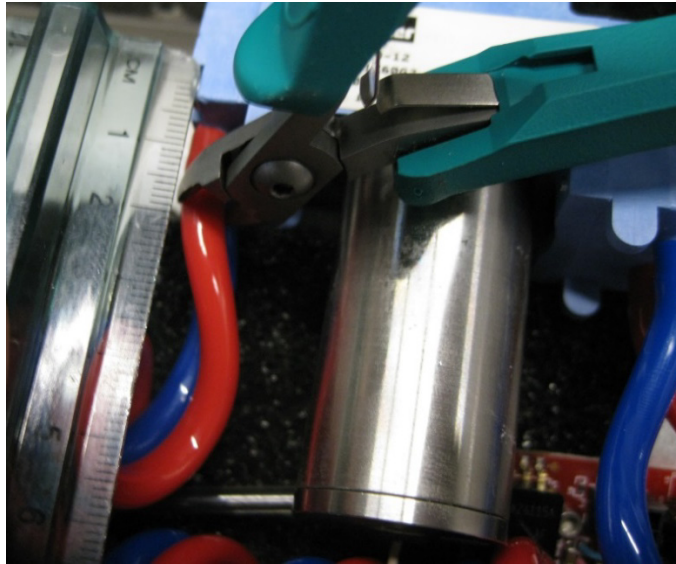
Location of cuts to remove pump assembly from tubing
